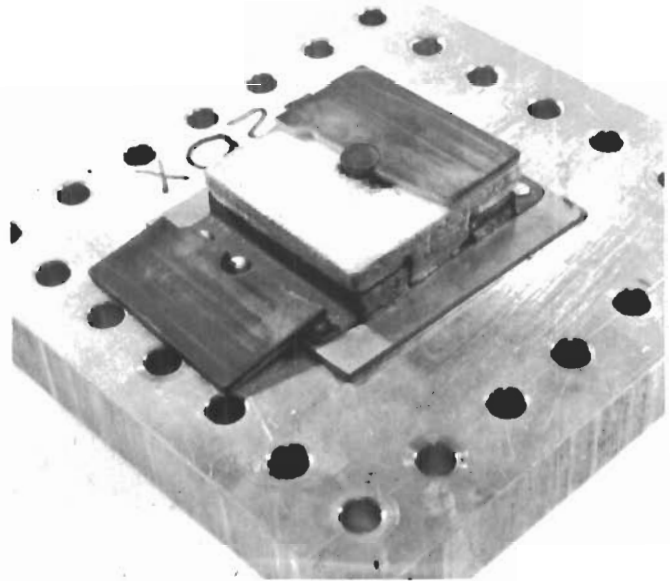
METAL SUBASSEMBLY - 3400°F TEST SPECIMEN - PIN TILE DESIGN
